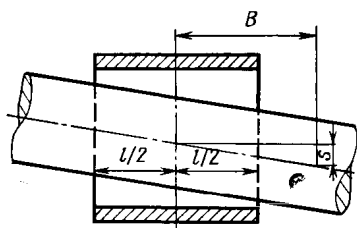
Parallel misalignment of bearing and shaft axes
